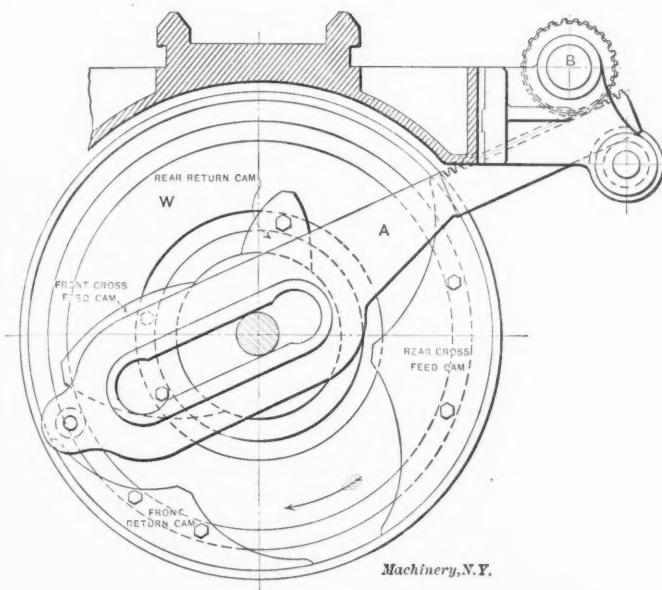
Diagram of Cross-slide Cams and Mechanism.
